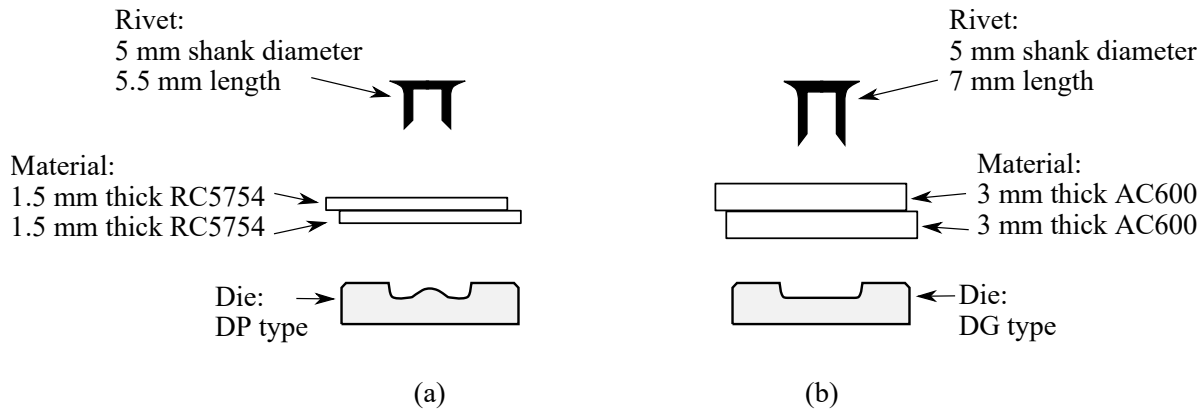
Details of the joint configurations used in testing. (a) Joint A. (b) Joint B. Joint configuration is defined by the unique combination of rivet type, material stack, and die type.
